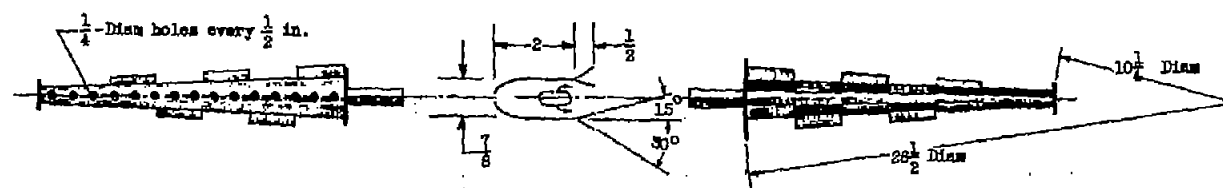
Continued. Details of fuel-injector flameholders used in the 36° sector of a 28-inch-diameter ramjet combustor. (All dimensions in inches.)
